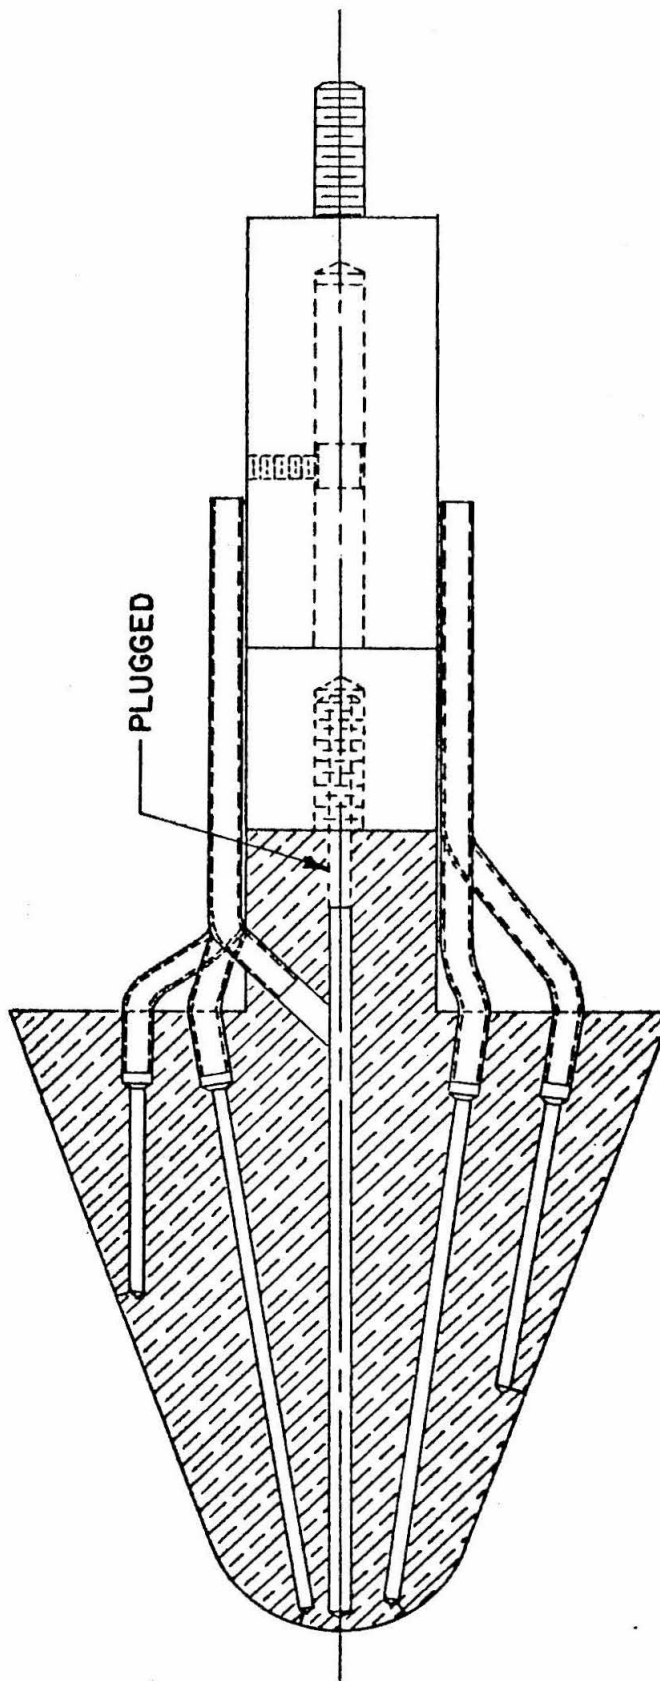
DETAILS OF TYPICAL MODEL CONSTRUCTION
